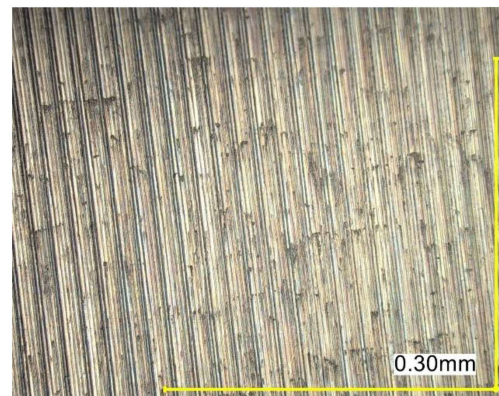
Surface after turning 1.4404 steel using LFV technology after machining with parameters $f_n = 0.03 \text{ mm/rev}$, $V_n = 869 \text{ rev/min}$, $a_p = 2 \text{ mm}$, $Q = 2$, $D = 3.5$; view of the sample at x100 magnification on Keyence VHX-900F.
